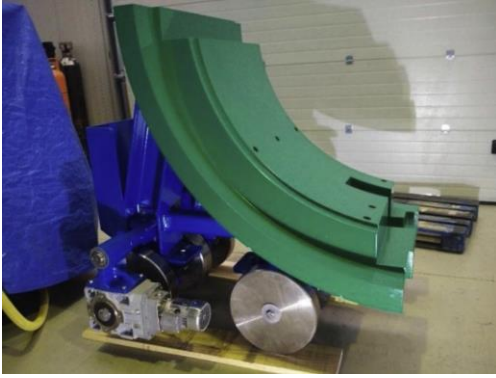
One of the mobile trolleys after manufacturing and assembly.
